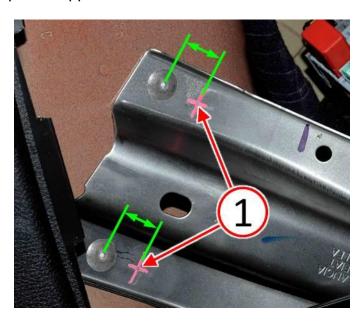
Measure Mark And Center Punch Rivet Hole Locations
